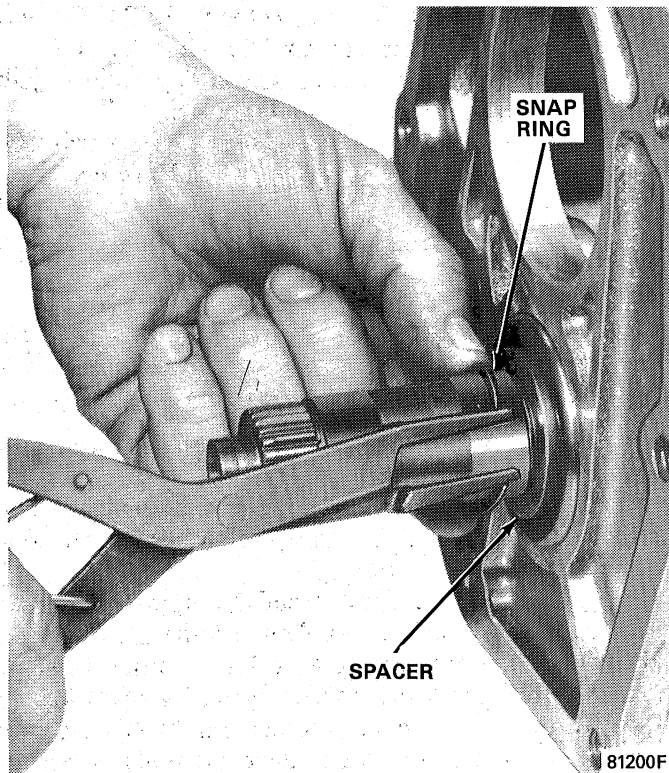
B-50 Countershaft Snap Ring Removal/Installation
